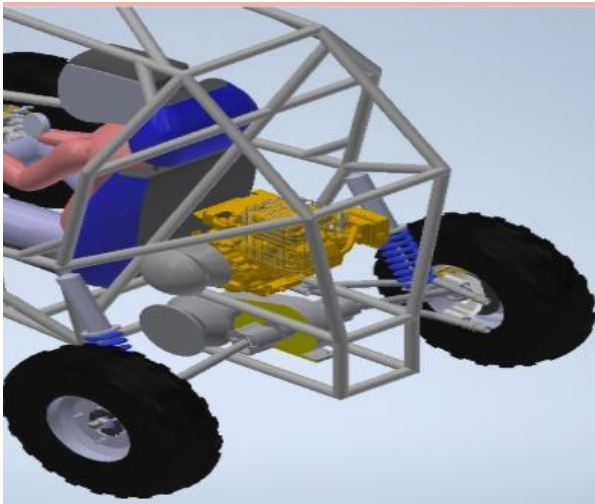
Placement of Engine and Reduction gearbox w.r.t Rear Frame
